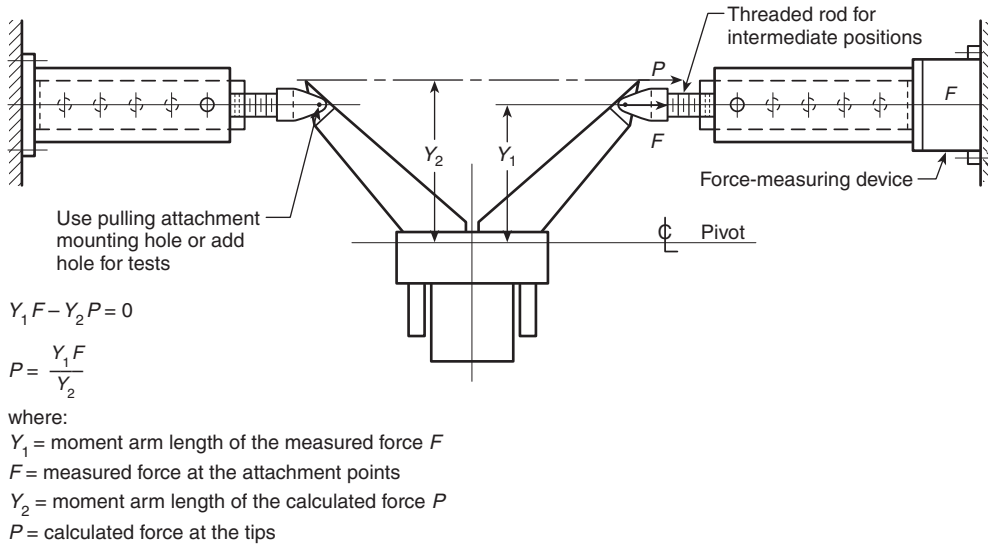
(a) Test Fixture to Determine Spreading and Retracting Forces of Spreaders.
